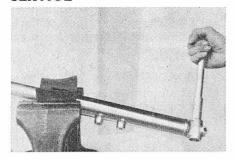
Care should be taken to prevent damage to outer tube nut in vise.
